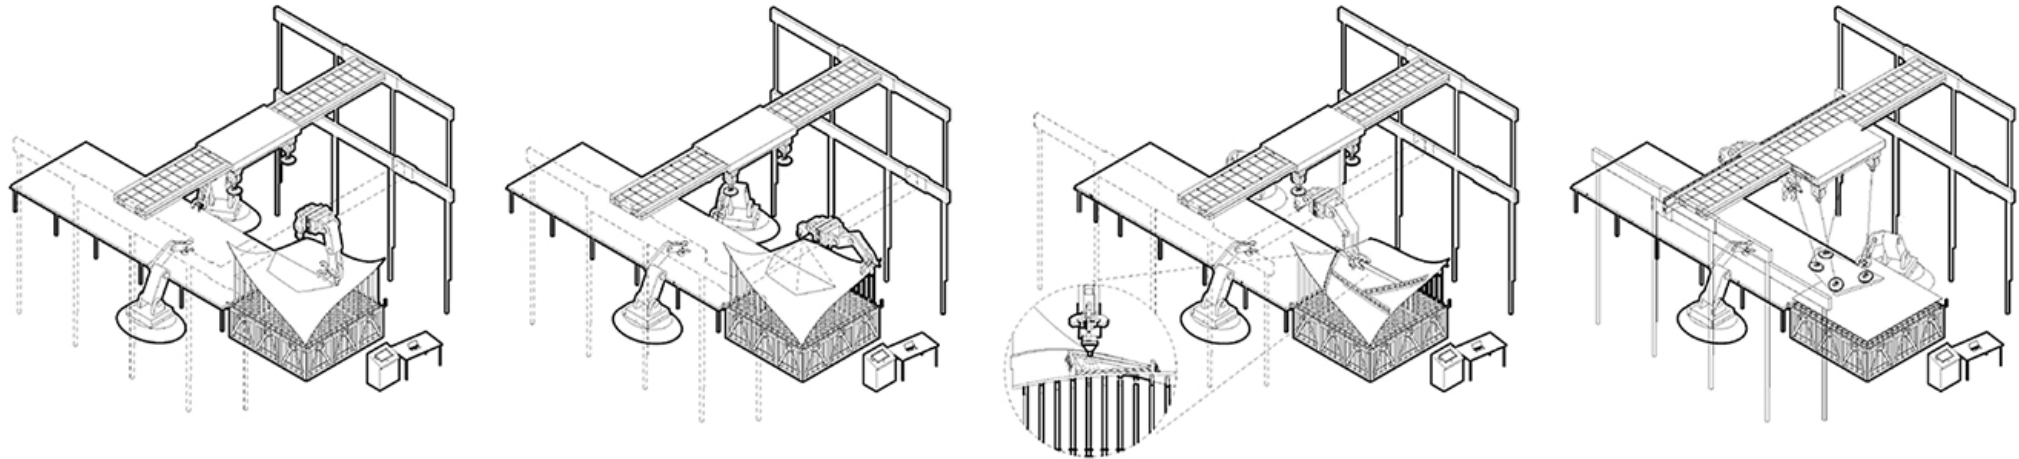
Emerging Manufacturing For Modular Rib Shell Modules: Robotic/CNC Pin Molding
